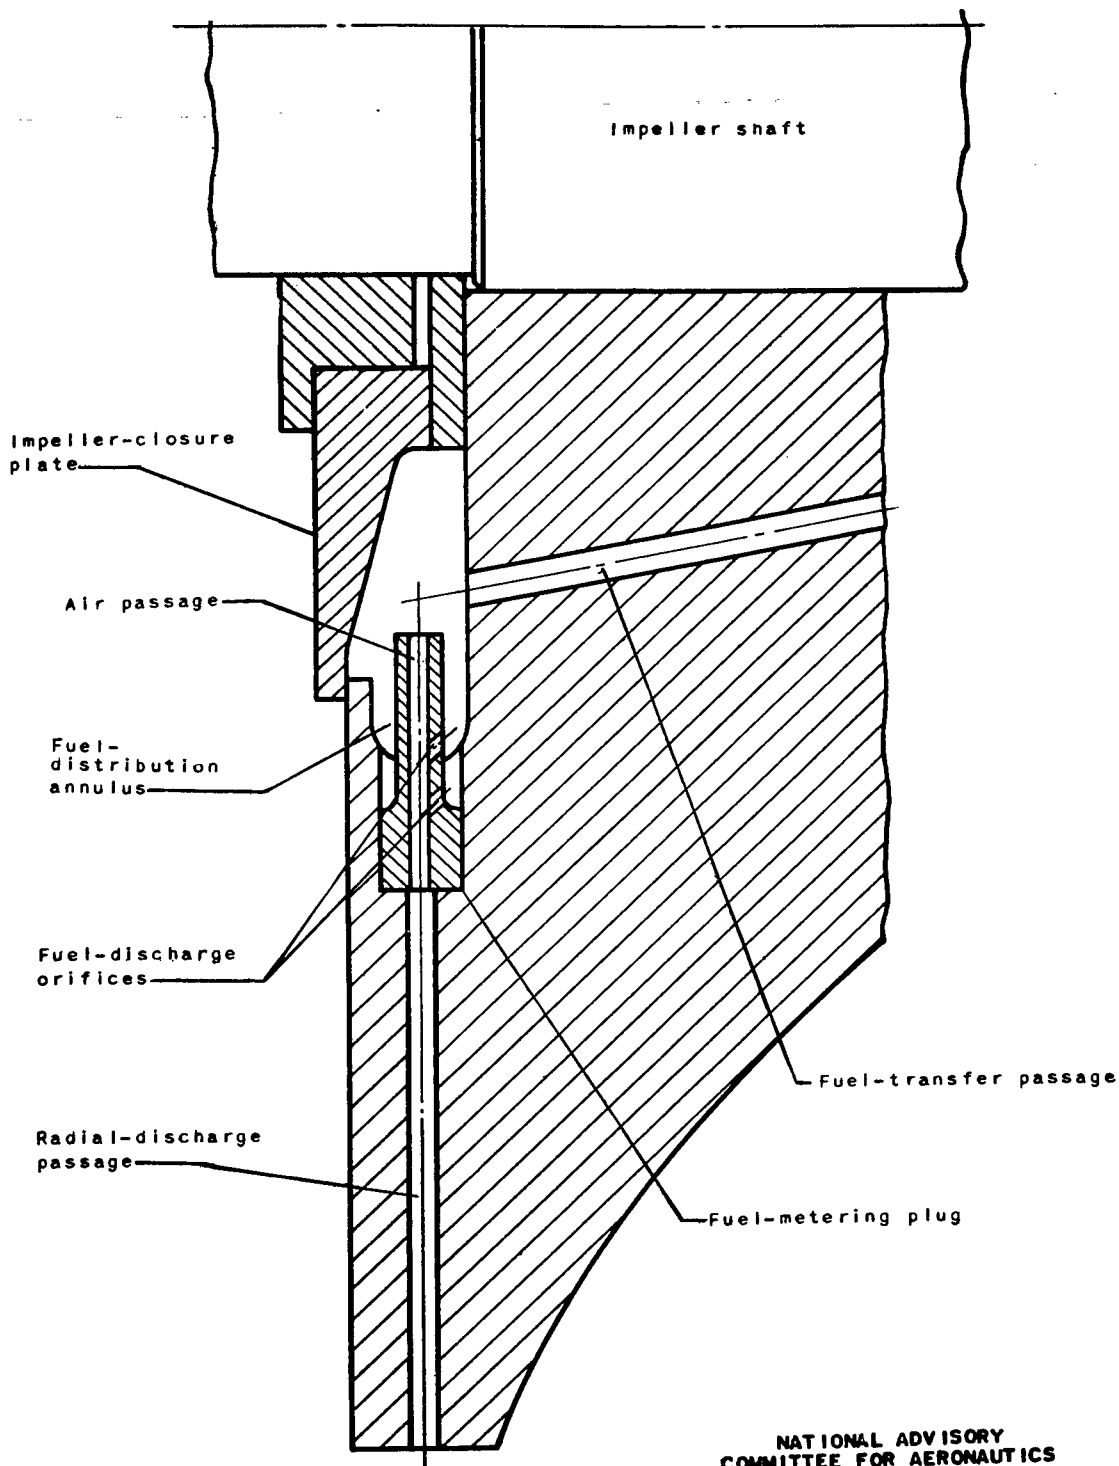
Installation of plugs for progressive fuel metering in original injection-impeller installation for double-row radial engine.
